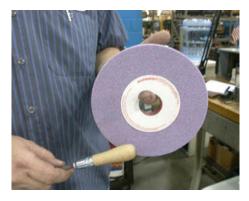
If the abrasive is cracked or damaged, you will hear a "dead" sound. If it is not defective, you will hear a ringing sound.
